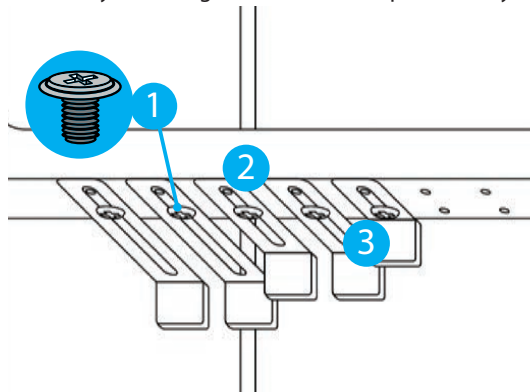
SC01-4504-10B and SC01-5504-10B
